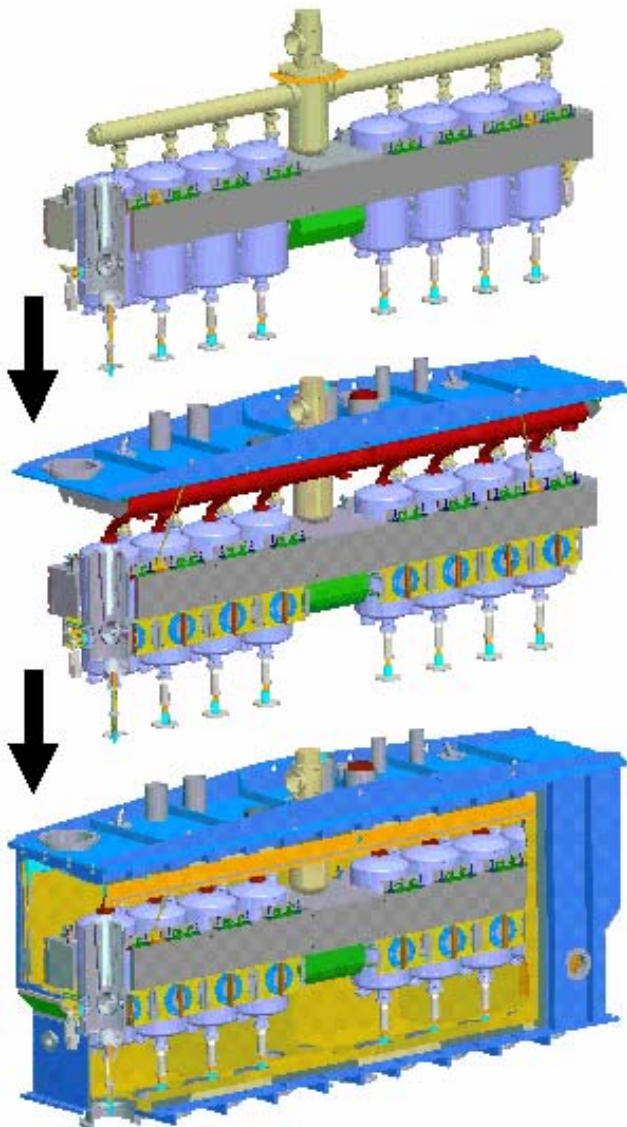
Upgrade cryomodule assembly sequence showing clean subassembly (top), dressed cavities suspended from lid (middle), and cutaway view of completed cryomodule (bottom).
